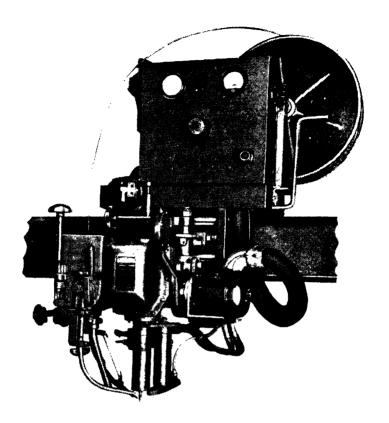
An Automatic D.C. arc welding machine: May use carbon electric flux feeder, and filler rod feeder (large drum upper right) or may use automatic electric feeder. It is used together with a D.C. arc welding machine (Courtesy of: The Lincoln Electric Company)
